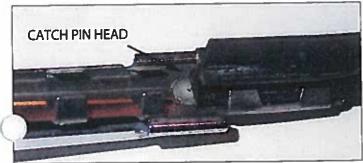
As soon as the old rubber is out, immediately slide the new strip in at least far enough to trap the pin. This will keep the metal backing strip positioned in the wiper blade frame.
